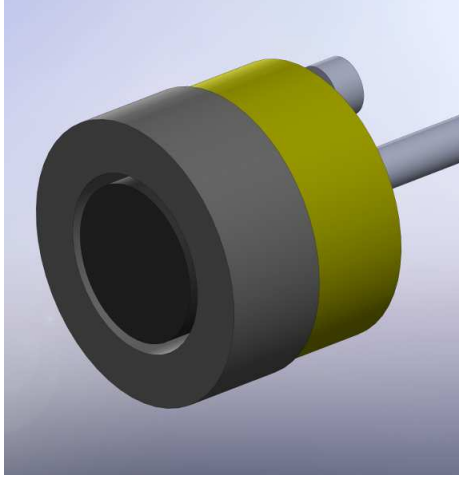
CAD drawing of the 15 mm planar probe with a guard ring.
